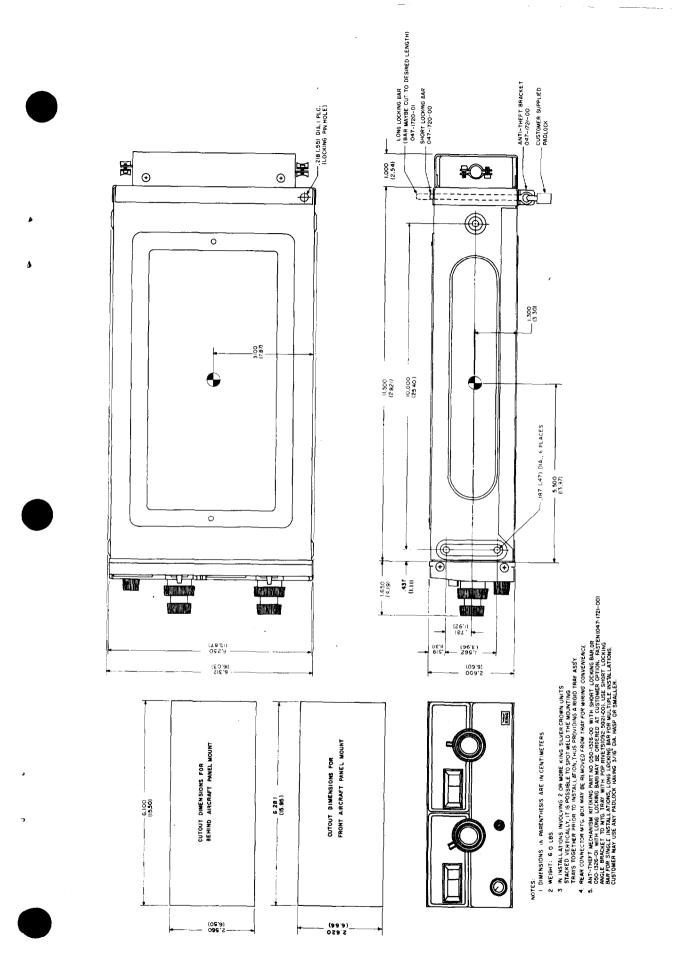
KY 195B OUTLINE AND MOUNTING DRAWING (DWG. NO. 155-5108-00 R-0)
